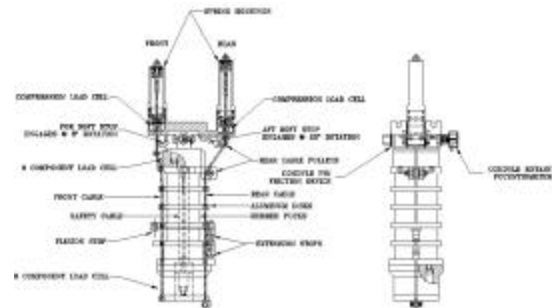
THOR neck assembly with front and rear cable control elements [NHTSA].
